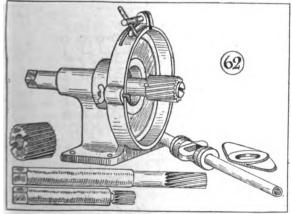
Another type of drum clamping device. This one has an extension to steady the reamer
